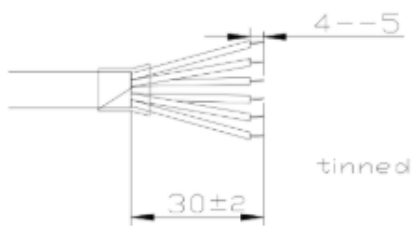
USB-RS485-WE Mechanical Details (dimensions in mm)
